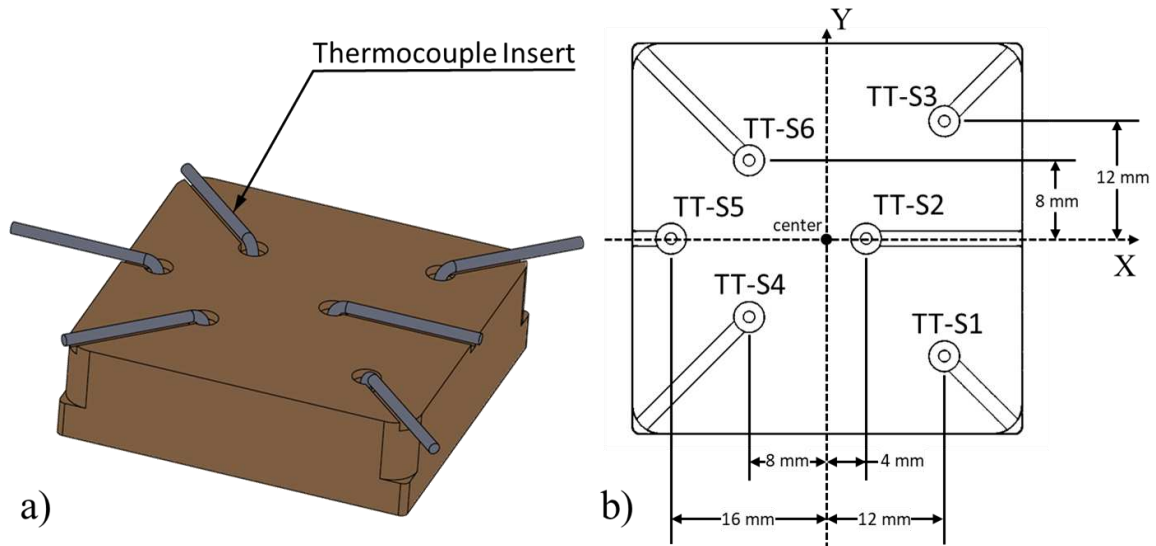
Target block embedded thermocouples. a) solid model view, b) thermocouple locations and labels.
